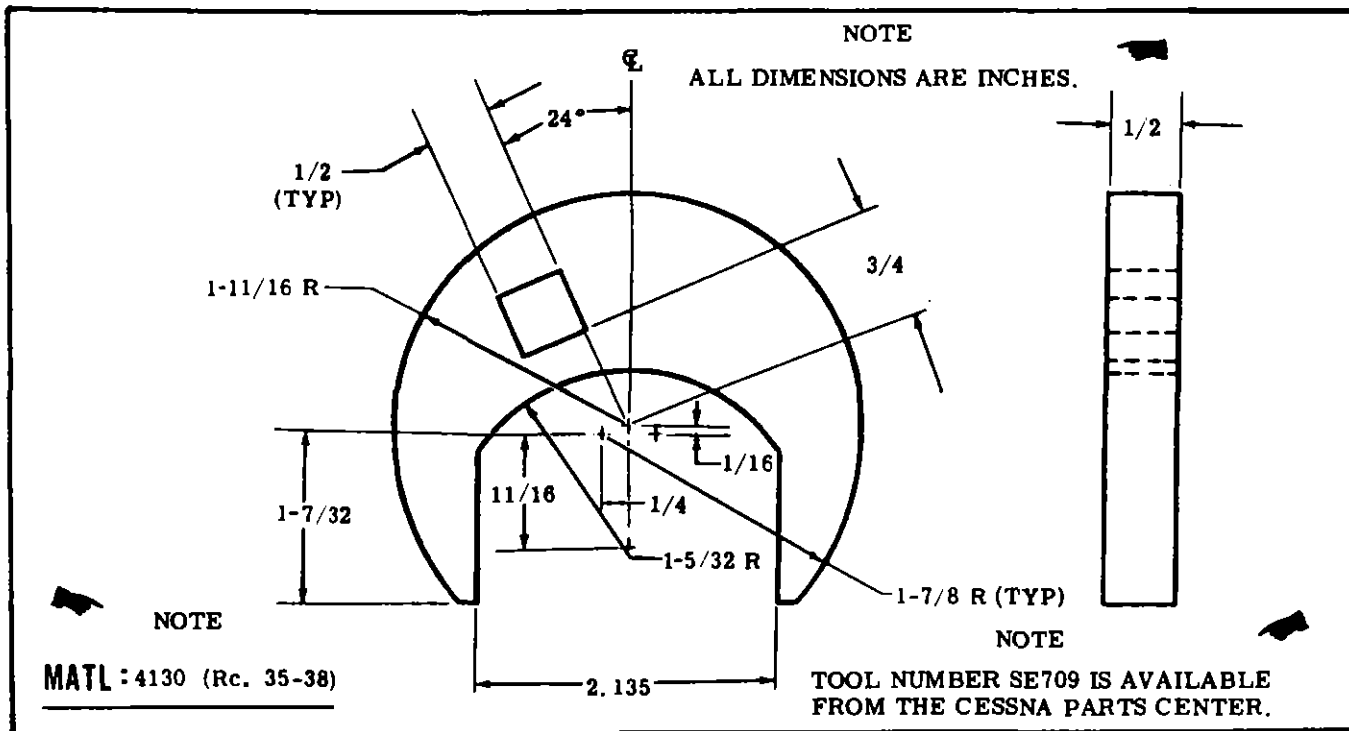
Oil Filter Adapter Wrench Fabrication
